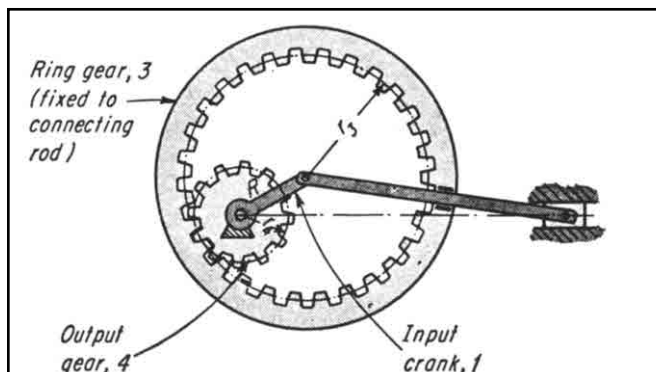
A more practical ring-gear and slider arrangement. The output is now from the smaller gear.
